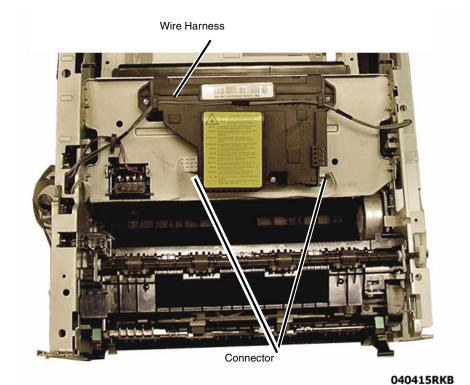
LSU Cable Connectors and Wire Harness (Top View)
